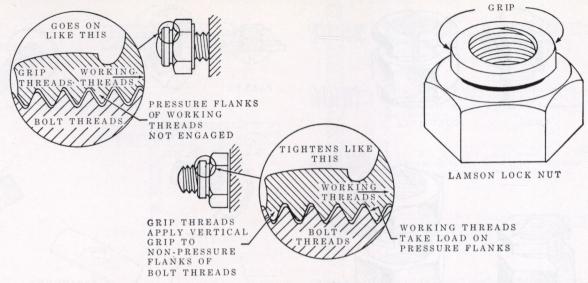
Lamson Lock Nut has grip threads in locking collar distorted out-of-round and heat treated to provide a spring grip. Thus when working threads are made to take working load, grip threads set up against non-pressure flanks of bolt threads to exert effective locking action as detailed in the sketches above.
